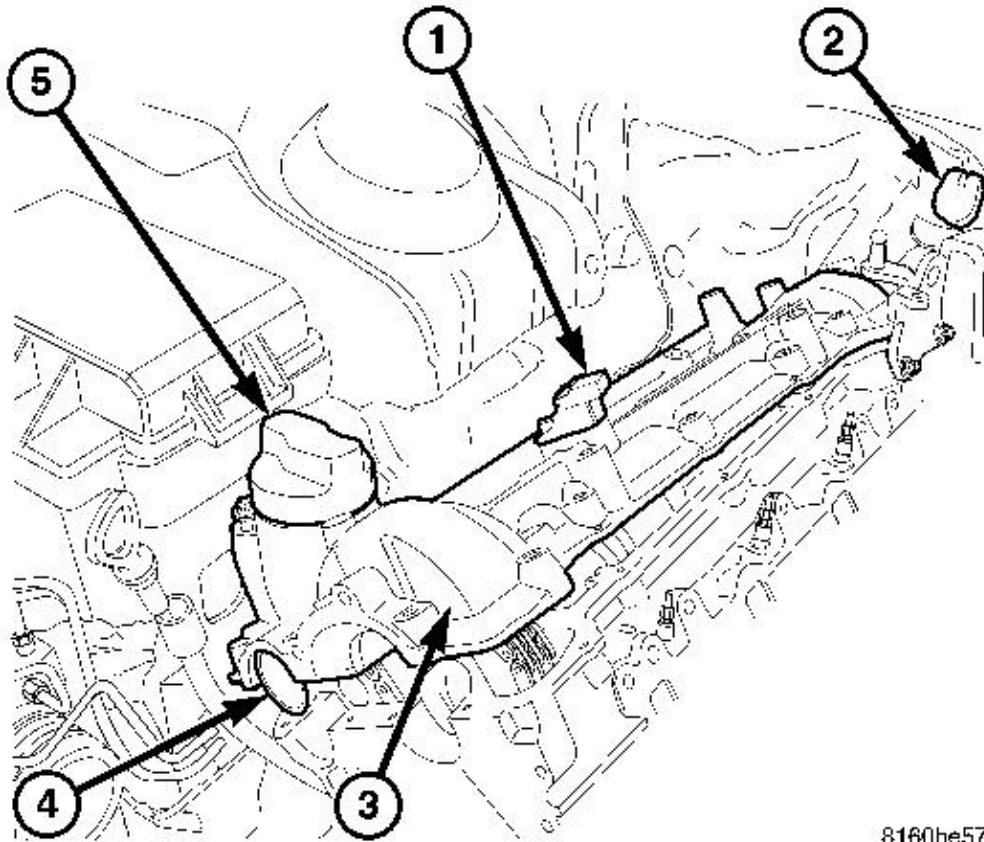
Identifying Oil Separator, Heater Hose With Bracket
